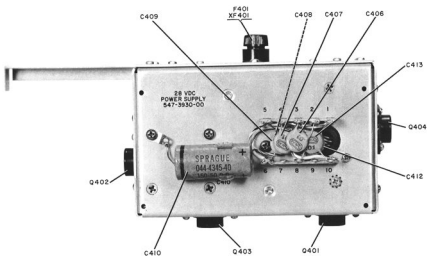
28-Volt DC Power Supply, Bottom View, Parts Location
